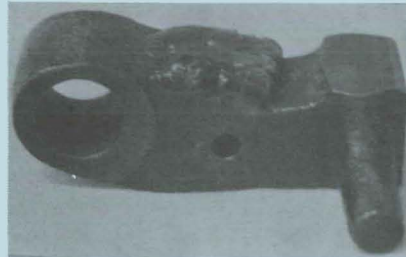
WELD BUILD-UP ON LOCKING LATCH
